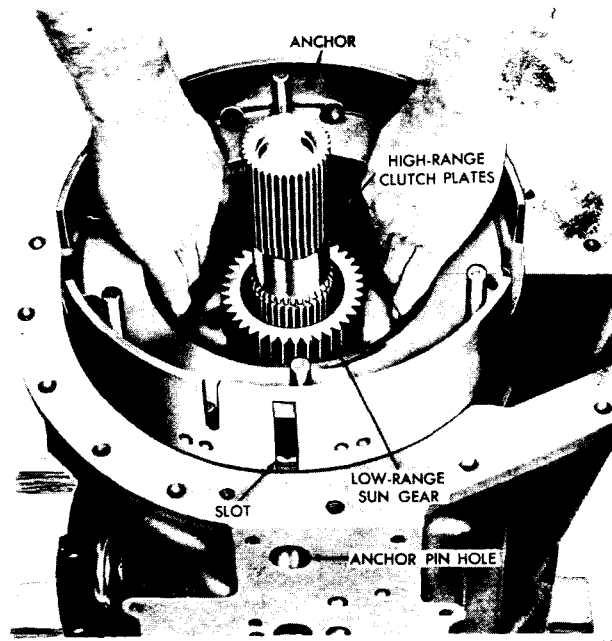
Installing (or removing) high-low-range clutch anchor assembly
